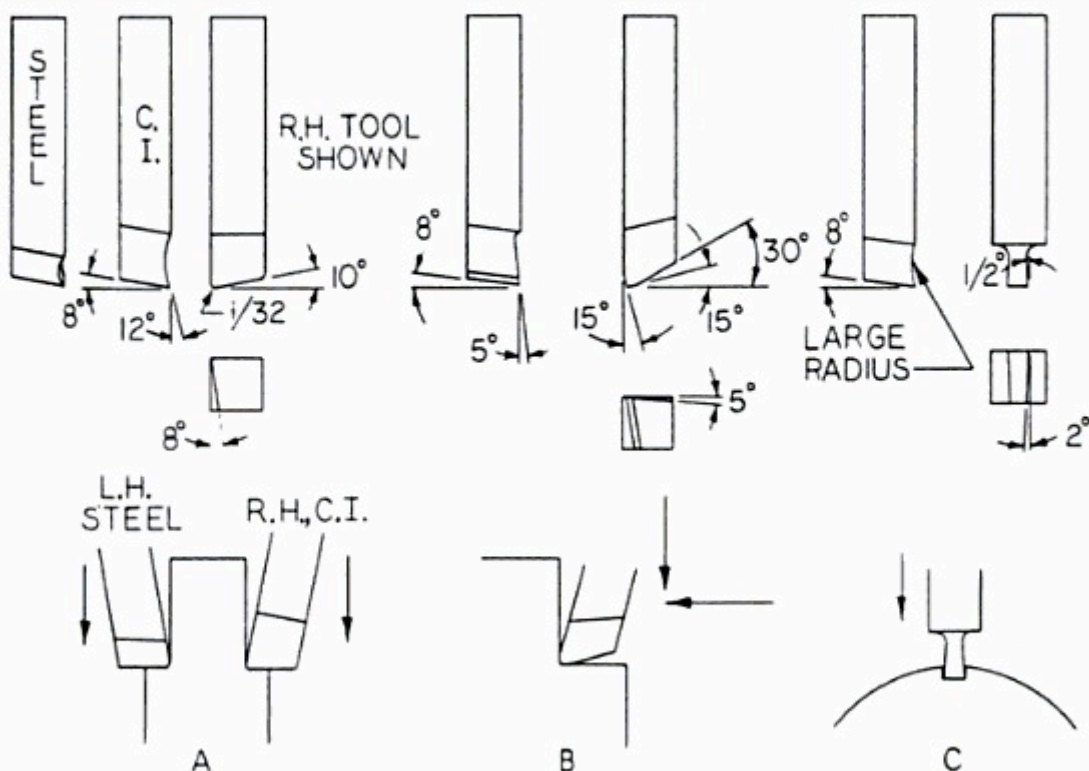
Shaper cutting tools. A. Side cutting tool. B. Shoulder-finishing tool. C. Keyseating tool.
